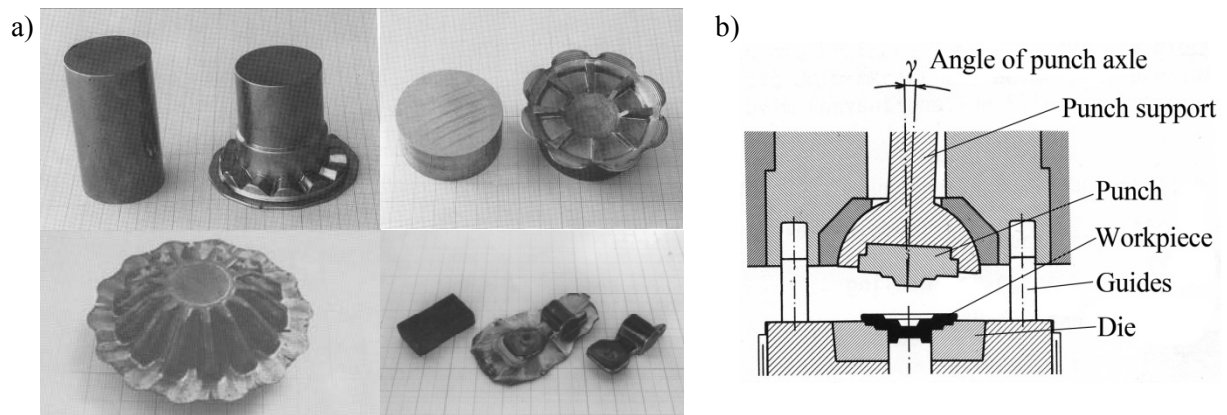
Parts obtained by orbital forging and tools for orbital forging [6]
